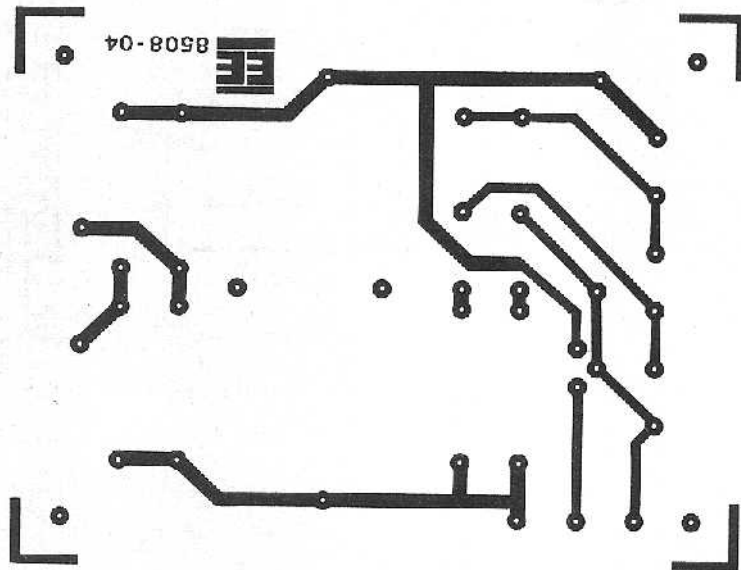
Printed circuit board (actual size) for the Drill Control Unit. This board is available from the *EE PCB Service*, quote order code: 8508 04.
